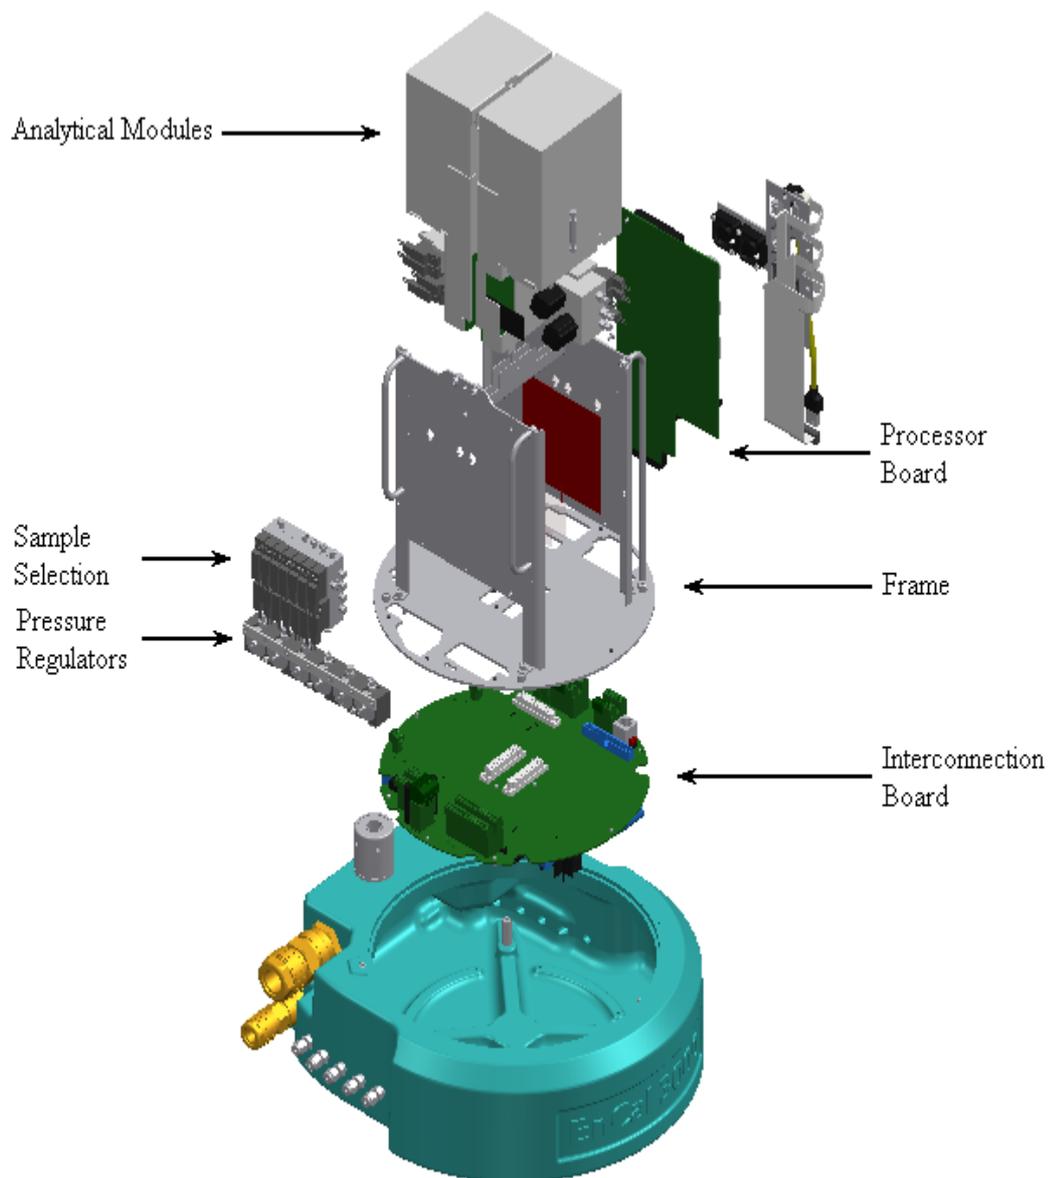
Exploded View on the Internal Parts of the EnCal 3000
